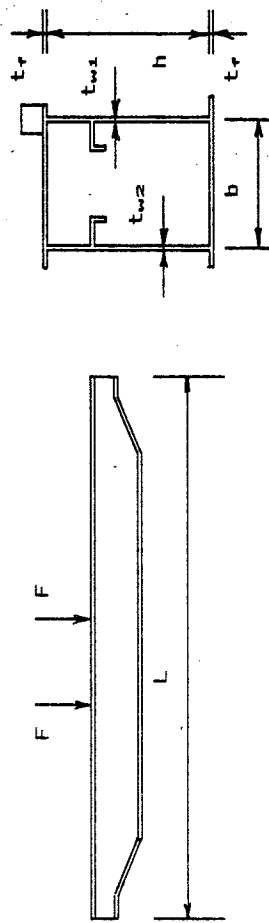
Cross section of the welded main girder of overhead travelling crane
